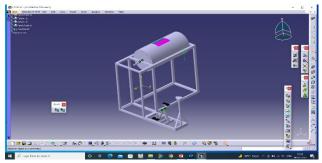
Design of Pedal Operated Washing Machine in Catia
